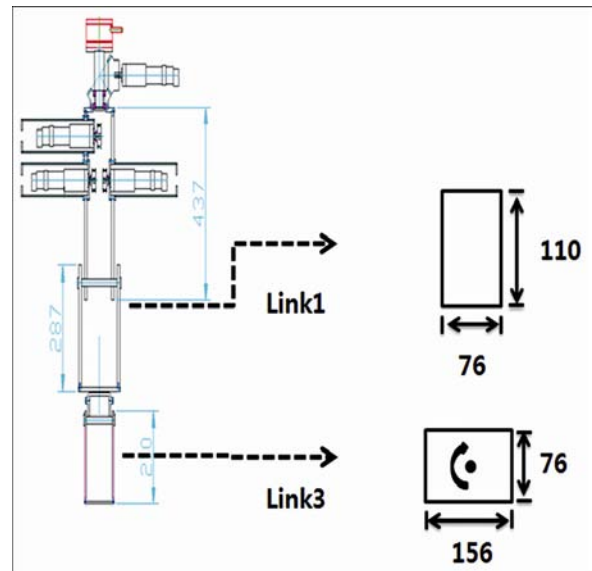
Robot-leg drawing and link section (a) Robot leg manufactured (b) Robot leg and water tank
